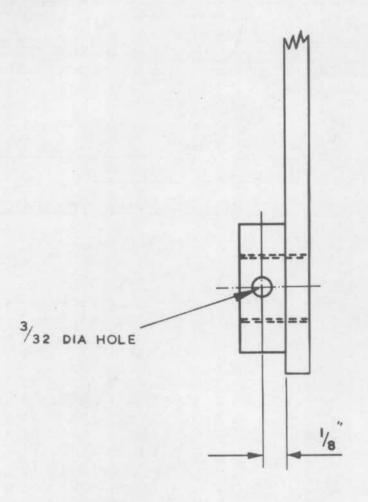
Position of hole in pivot bolt boss (Dimensions in inches)
